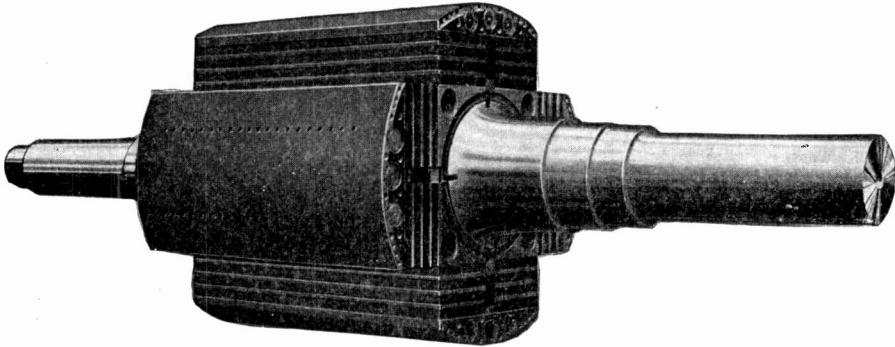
Four-Pole Rotor for 10,000-Kw. Machine
